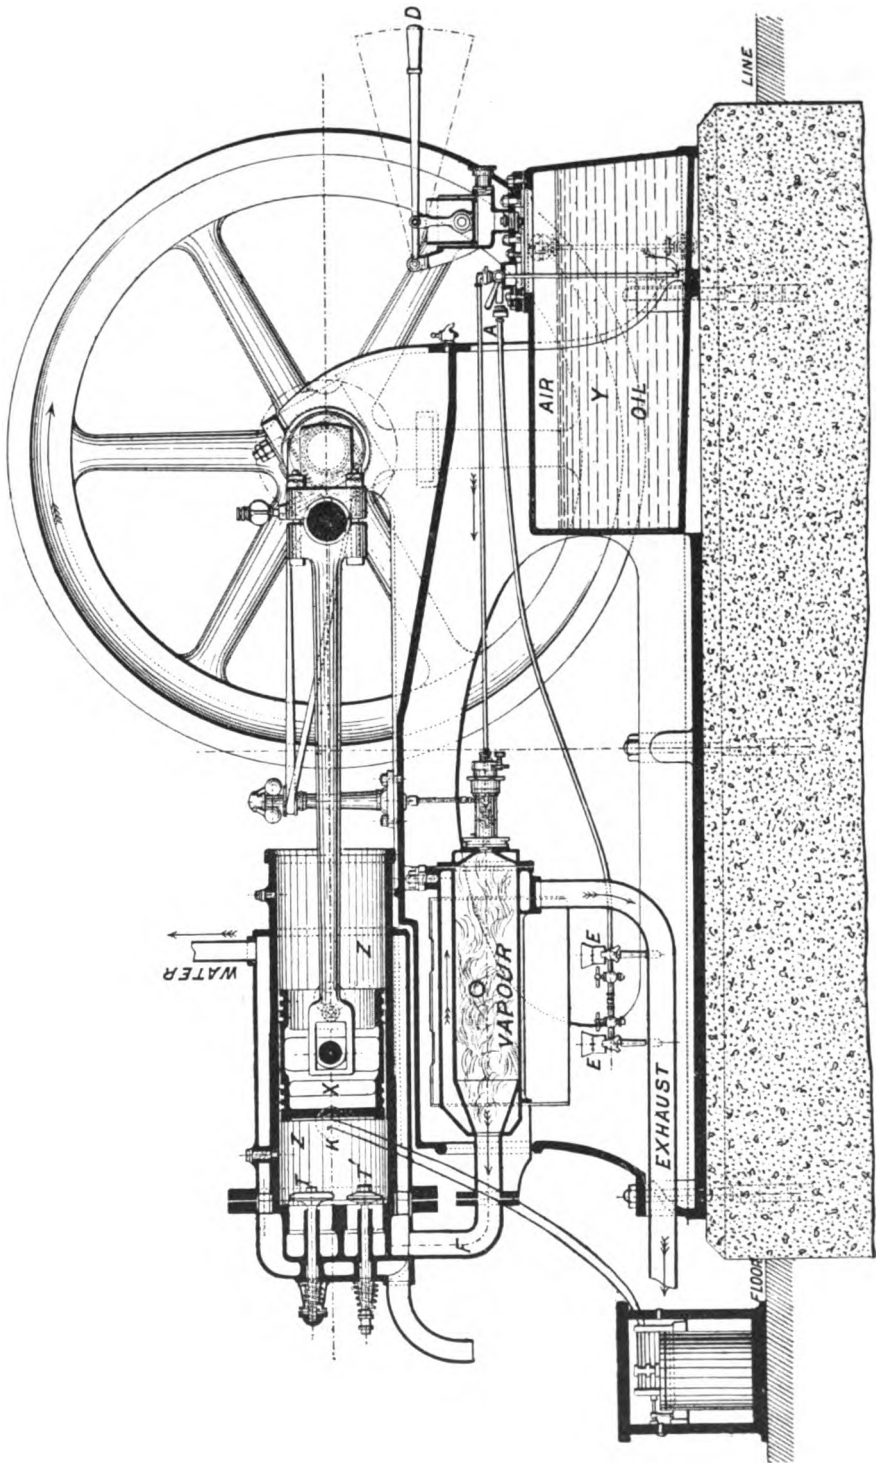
D.—SECTIONAL ELEVATION OF THE PRIESTMAN HORIZONTAL OIL ENGINE.
